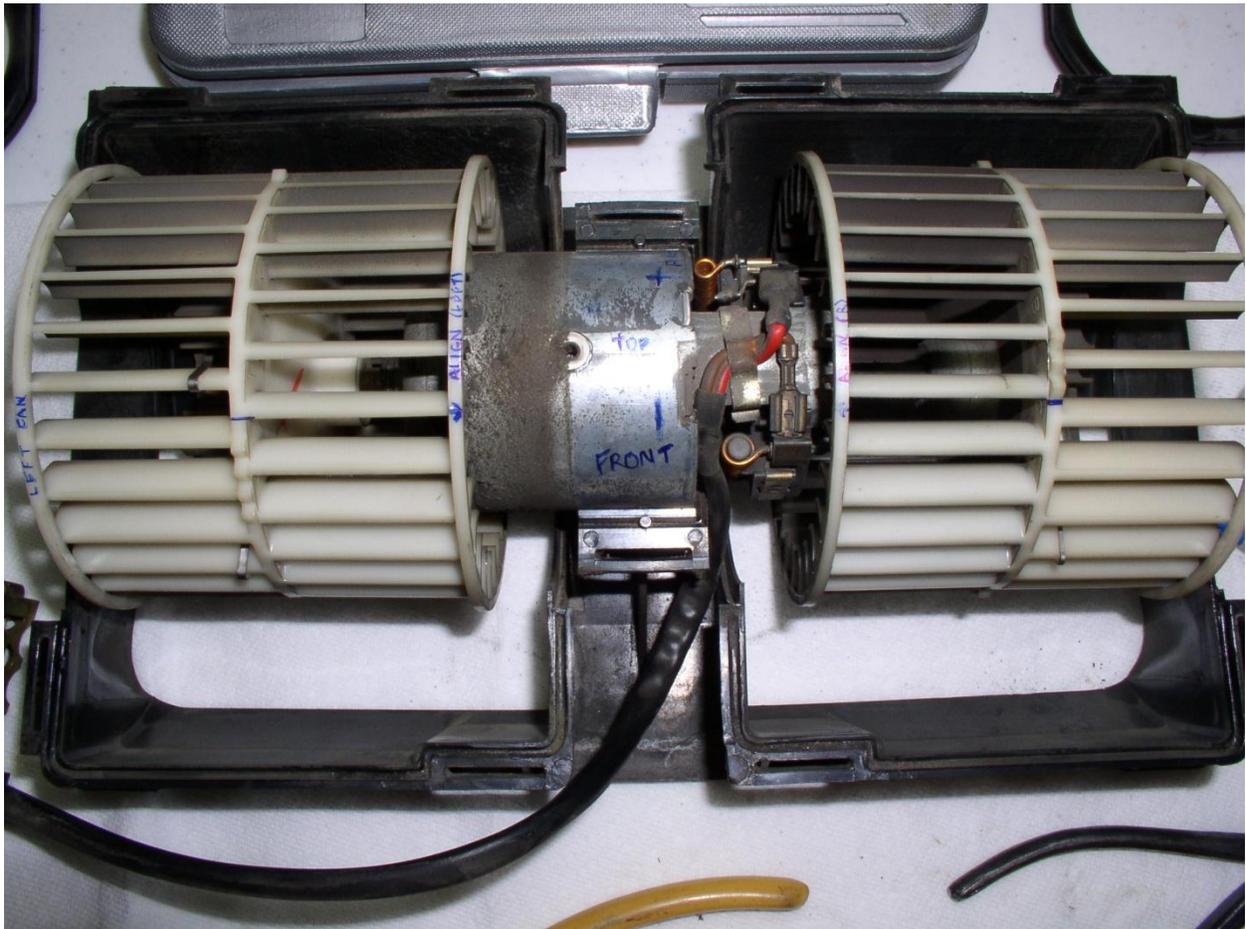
Mark *everything* to aid a proper and balanced reassembly. (Air intake guides removed for clarity)
